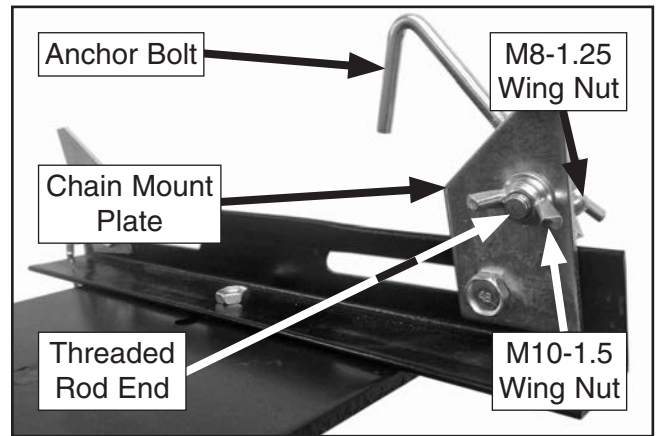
Threaded rod end and anchor bolt attached to chain mount plate.
